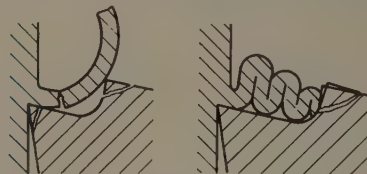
Over breaking, crowding and tool breakage caused by too steep a slope
